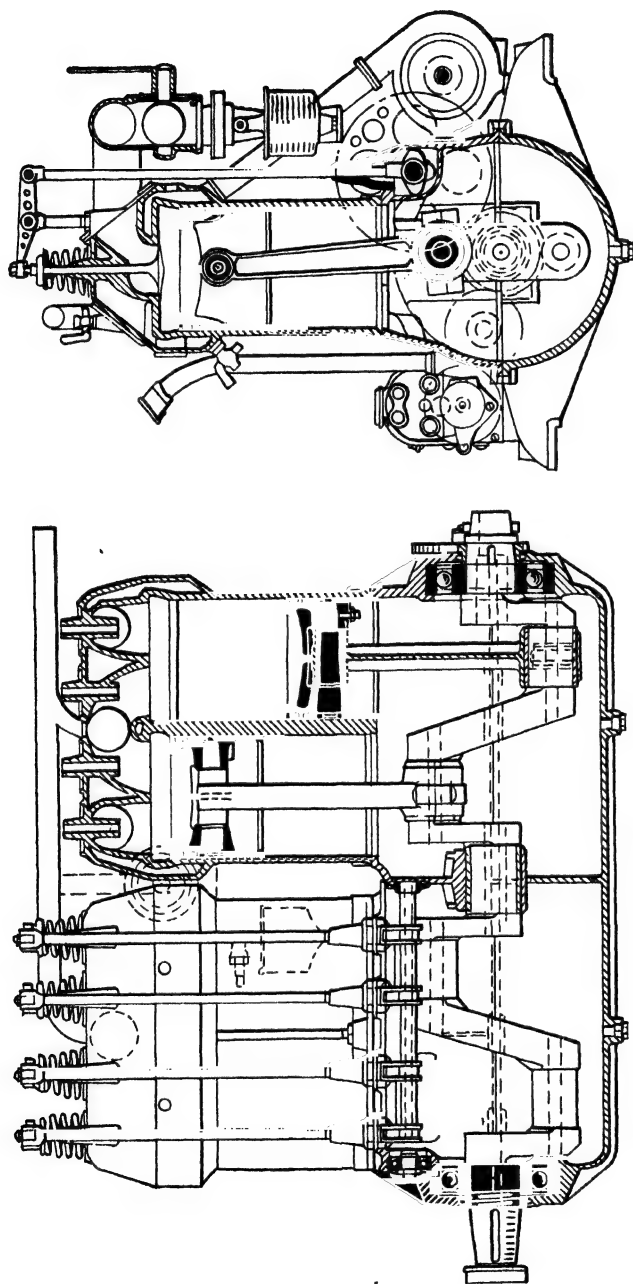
Side and End Sectional Views of Four-Cylinder Argus Engine, a German 100 Horsepower War-Time Design, Having a Bore and Stroke of 5.60 Inches, and Developing its Power at 1,368 R.P.M. This Engine Weighed Three and One-Half Pounds per Horsepower Dry.
